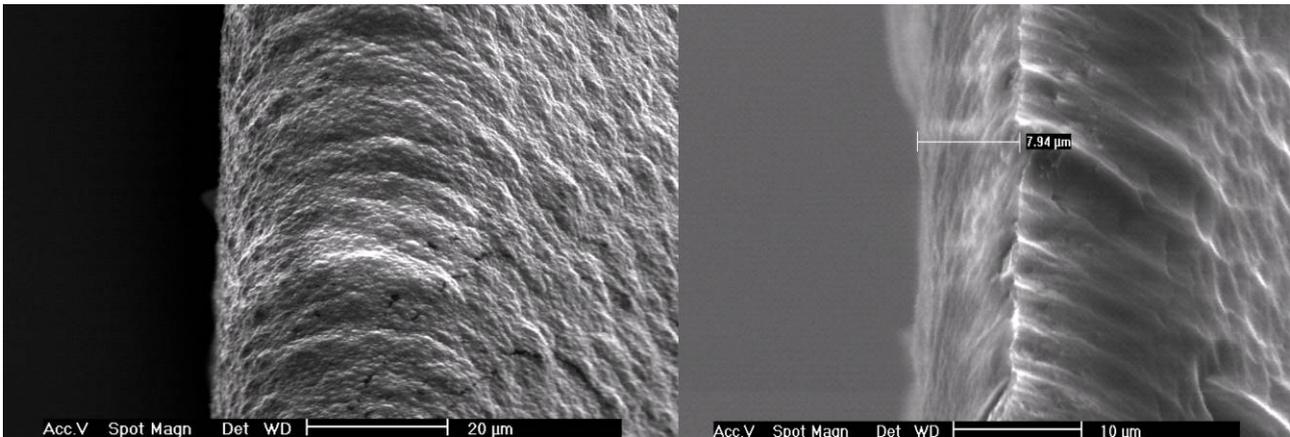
Top view of a diamond coated cutting edge before (left) and after (right) the sharpening process.
